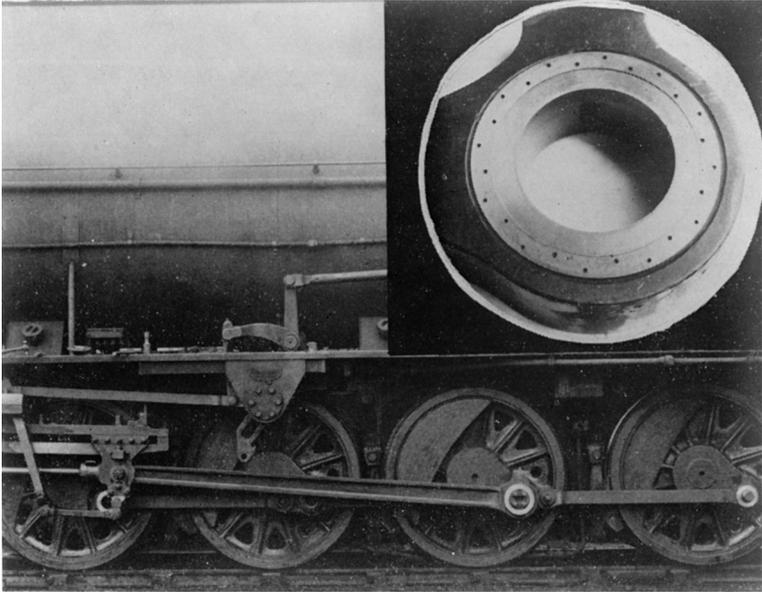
2-8-0 W.D. coupling rod shewing felt pad in position.
